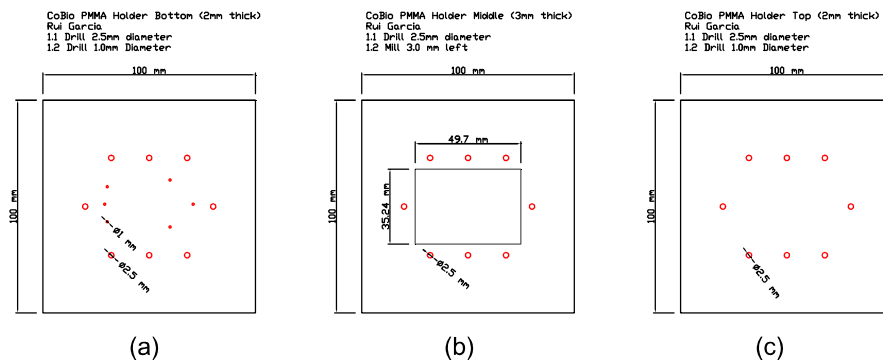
Top view of the PMMA microfluidic device holder ((a) – bottom plate, (b) – Middle plate, (c) – Top plate). The plates have through holes for bolt tightening and only the top plate has access holes for microfluidic device inlets and outlets.
